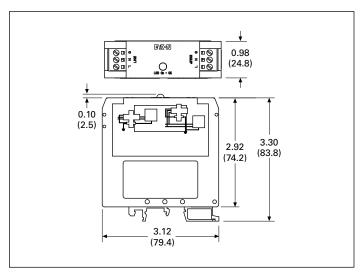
AGCFxxx10-DIN Dimensions in Inches (mm)
